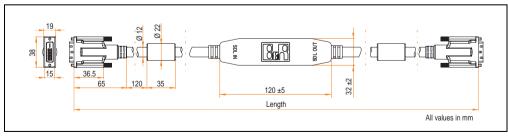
Dimensions - SDL flex cable with extender 5CASDL.0x00-13
